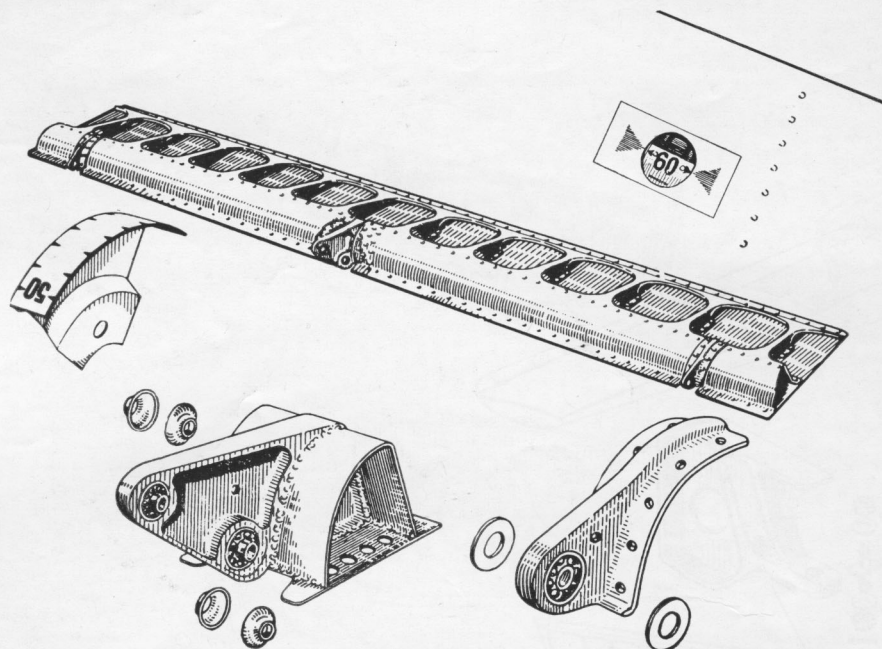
Flaps are built around a metal monospar and are constructed in two halves riveted together at the middle hinge, with inclusion of actuating arm. This hinge, unlike the inboard and outboard hinges, is welded to the spar and carries a dial with readings from 0 to 60 deg. Numbers show through a hole in the top skin (as illustrated in the top detail sketch) so that pilot has an exact reading of each flap's position at all times. The flaps are electrically operated with their individual motors connected through a relay control box so that neither will get more than 3 deg out of line with the other.
